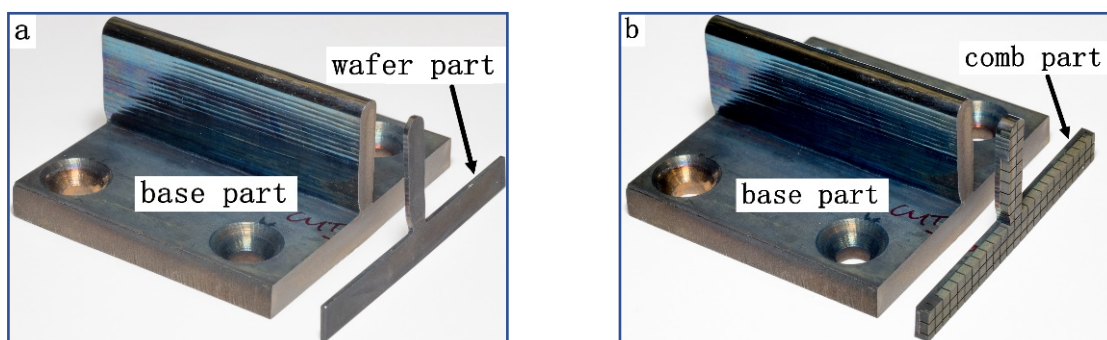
(a) thin wafer cut; (b) comb grid cut
